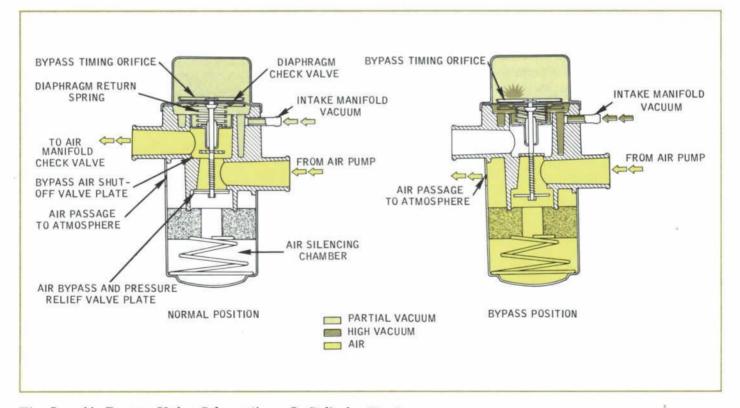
Air Bypass Valve Schematic — 6-Cylinder Engines
